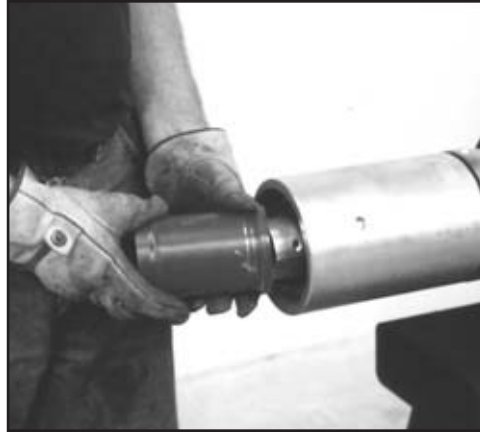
INSTALL ASSEMBLY TOOL OVER THREAD OF CONTROL TUBE
